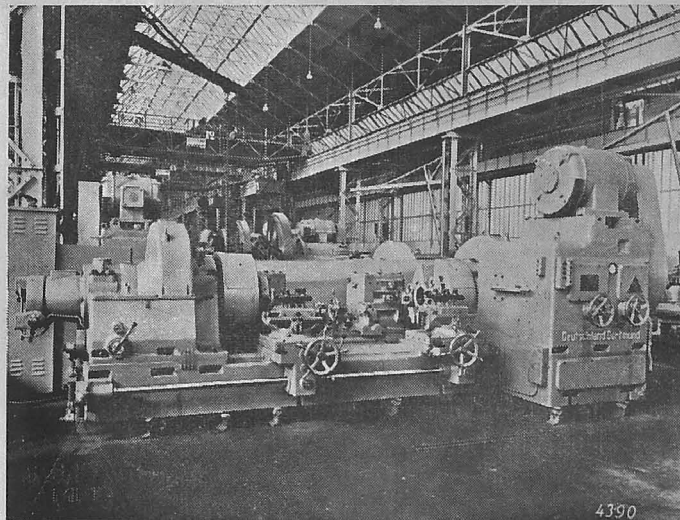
MFD Wheel lathe for wheel sets with outside journals.
